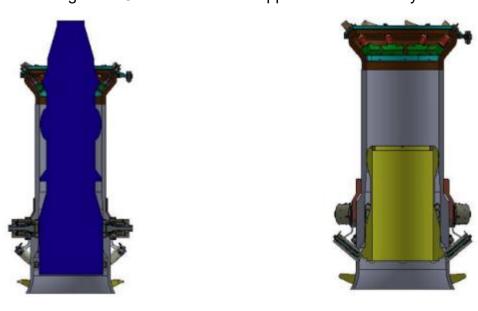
TSUDL main parts for (a) rigid risers and (b) flexible risers
